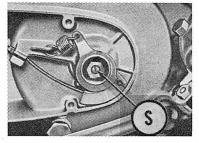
The clutch adjusting screw (S) is located under the cover on left side of engine.
